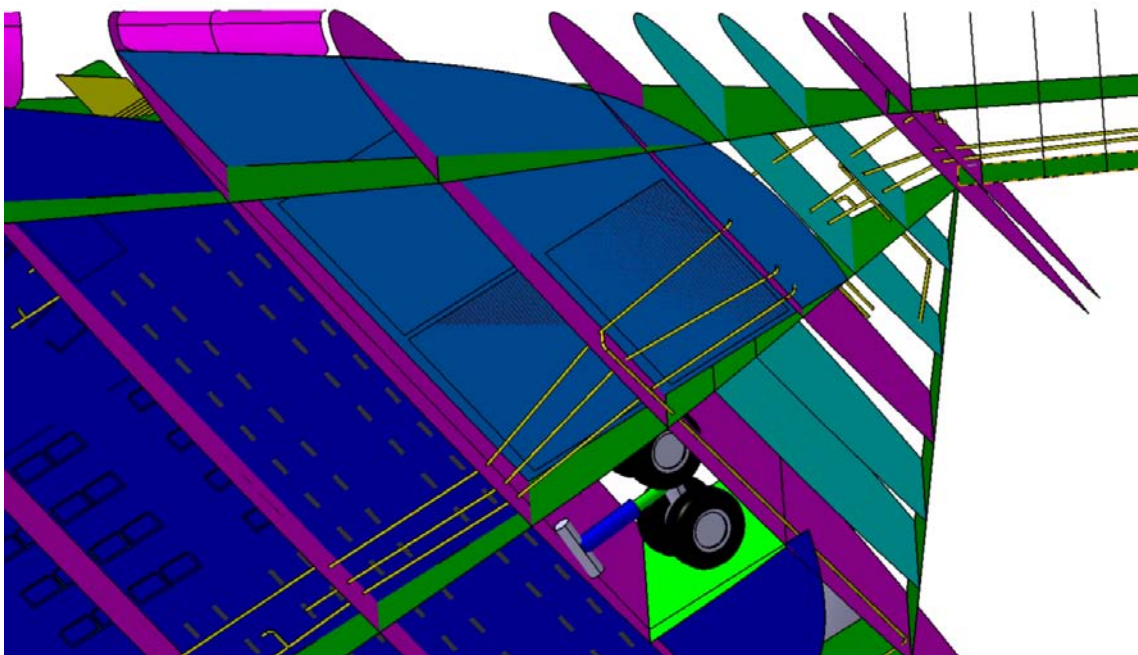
Initial System Assembly Geometry of FW-11 (Bottom View)
